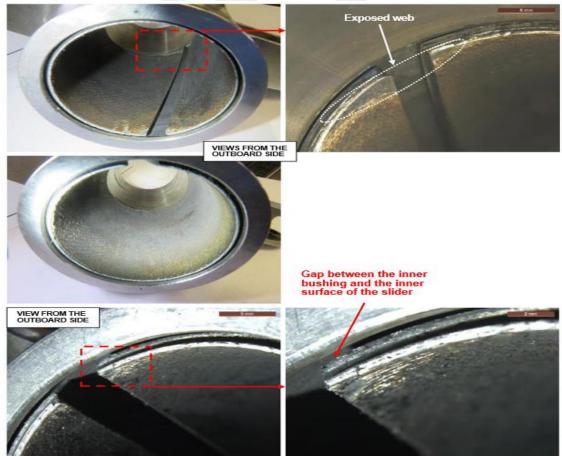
Details of the slider assembly after the cleaning. The inner bushing is worn and leaves a small portion of the underlying web exposed. Furthermore, the bushing is completely detached from the inner surface.
